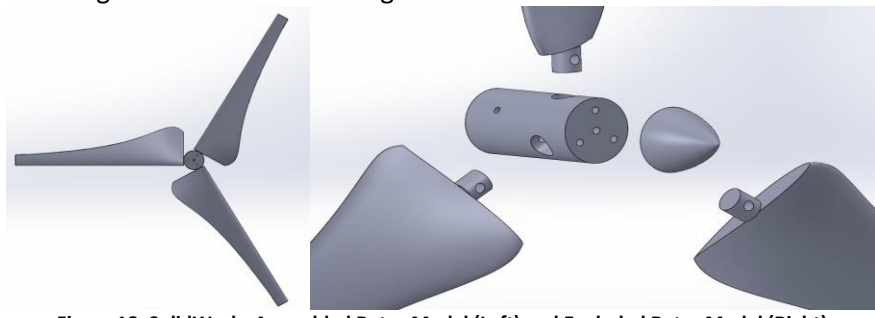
SolidWorks Assembled Rotor Model (Left) and Exploded Rotor Model (Right)
